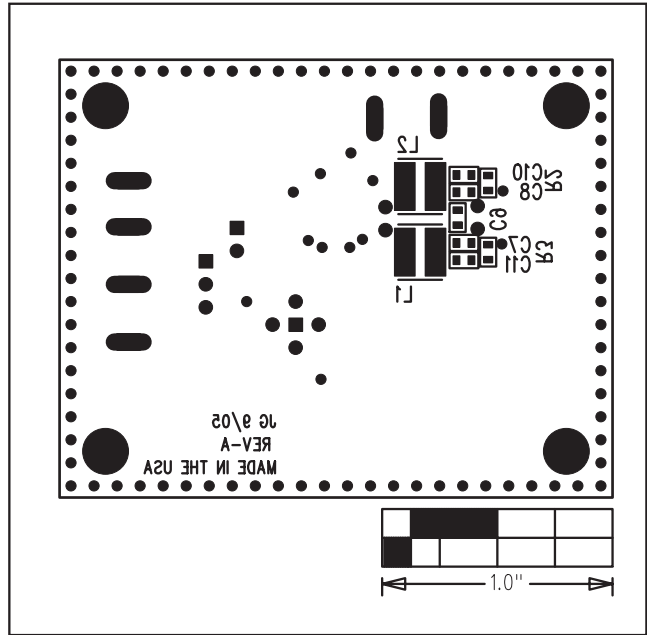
MAX9705B EV Kit Component Placement Guide—Solder Side
